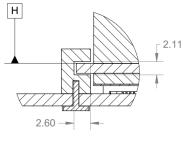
Small Form Factor Baseboard Chassis CTF Dimensions (Rail Guide Detail) - Detail C
